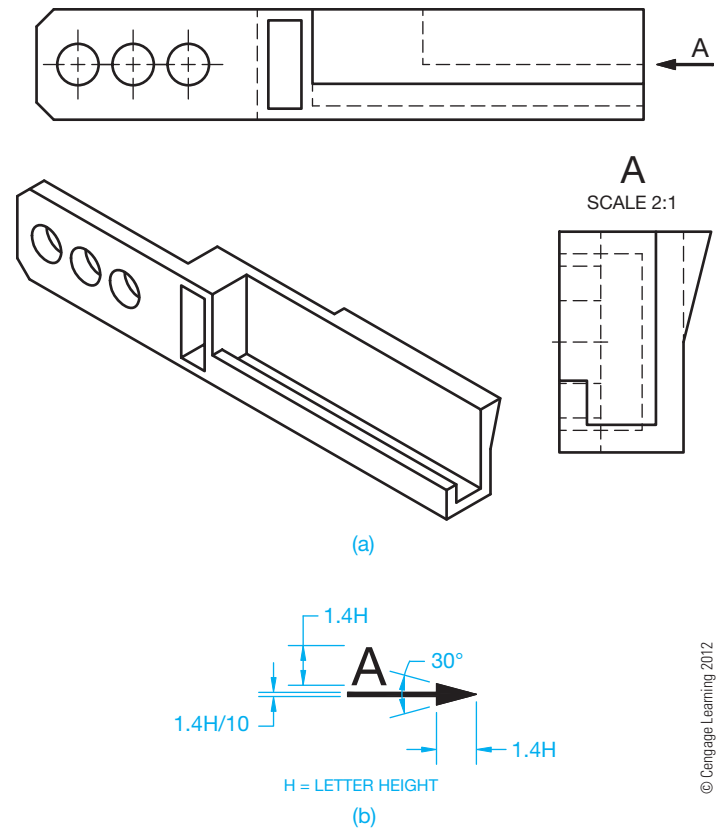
(a) A removed view drawing using the reference arrow method. (b) The view arrow detailed for use on your drawings.
